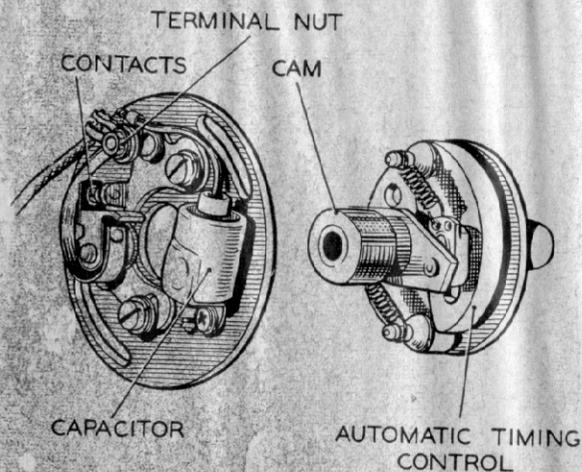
Contact Breaker and Automatic Advance Mechanism Model CA1A, removed from engine.
